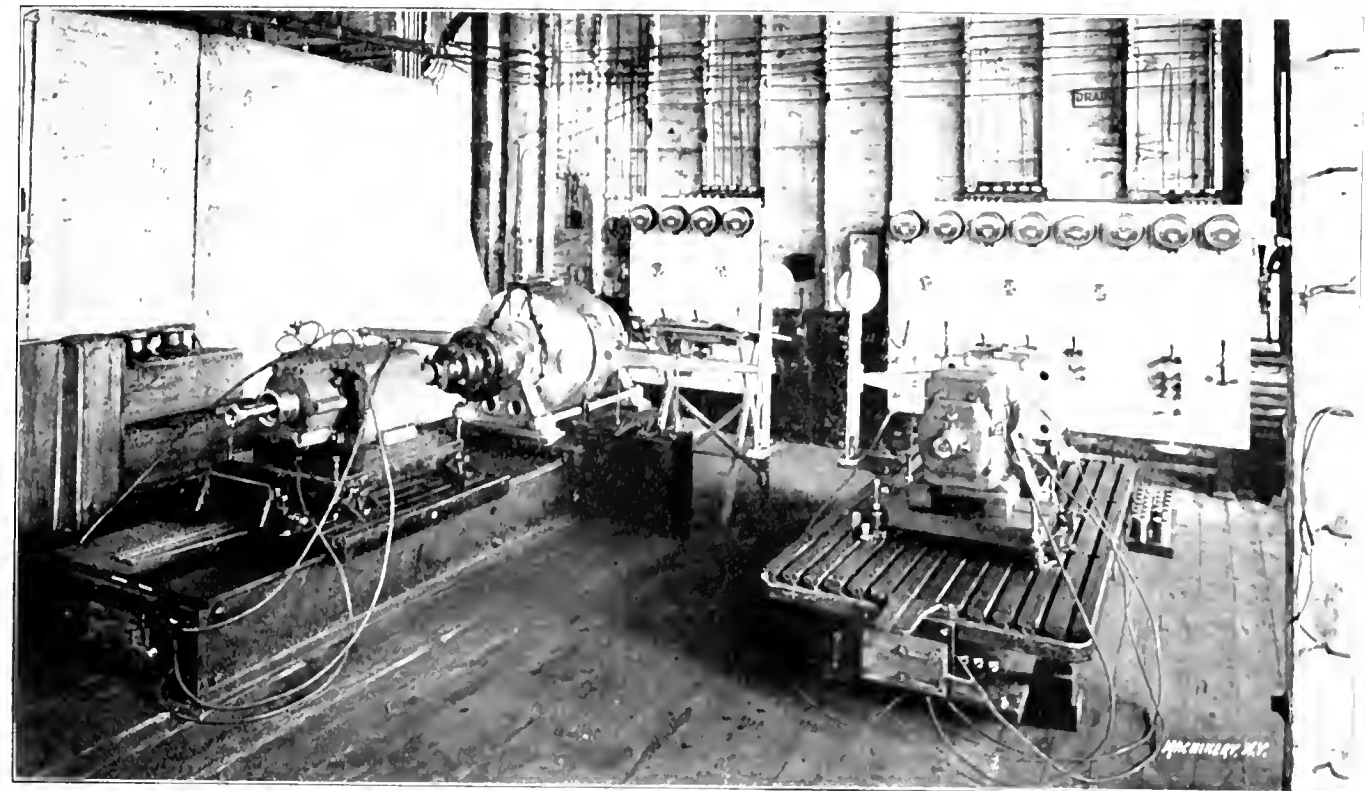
View of Crane Motor Testing Apparatus, Pawling & Harnischfeger Shop, showing Switch board
